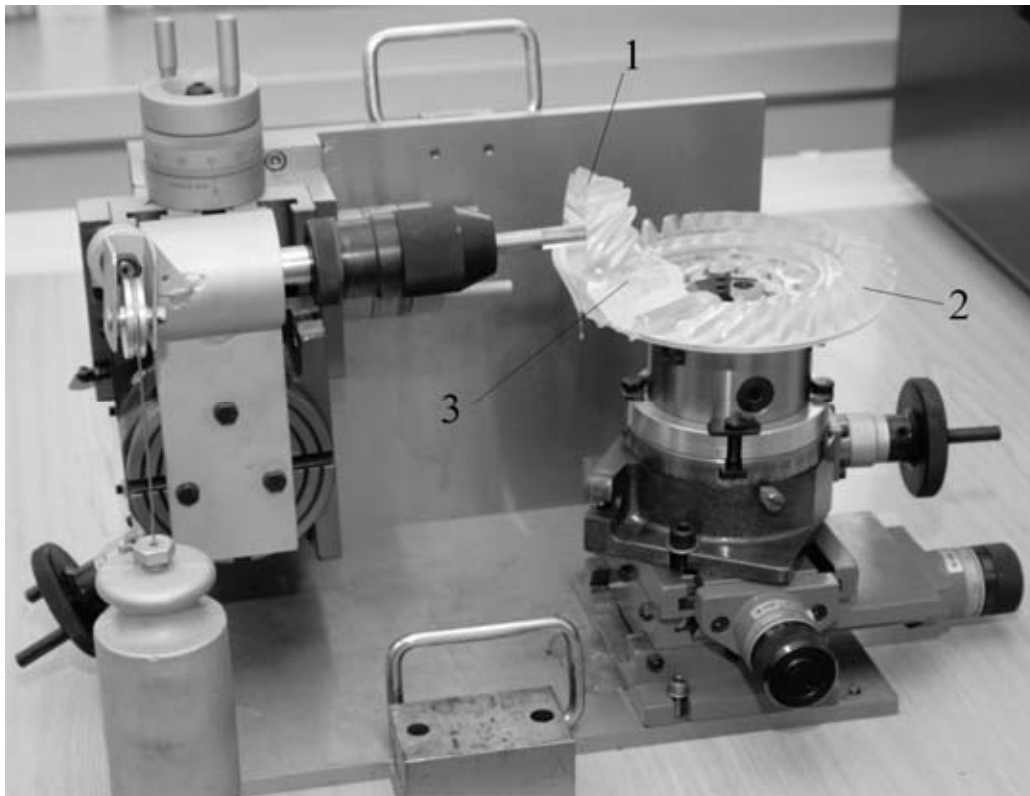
Testbed with bevel gears: 1 – pinion, 2 – gear, 3 – container with silicon
